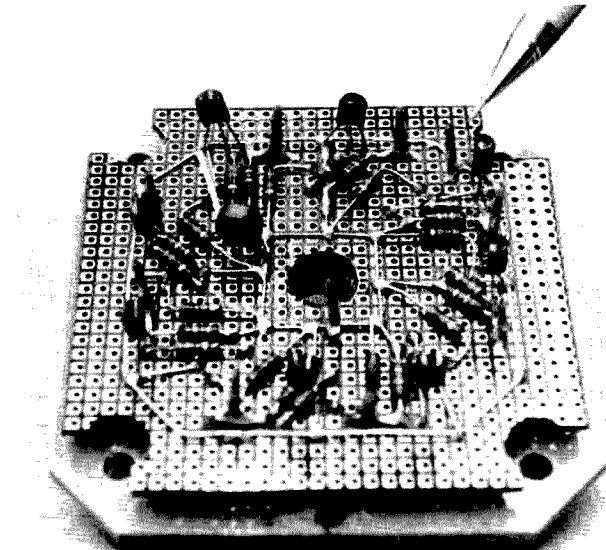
Photo E. The electronic components mounted on what we call a "do all" PC board. The pencil is pointed at one of the ten pins used to terminate the cable coming from the readout LEDs in the shack. The component at 10:00 o'clock near the shaft hole that looks like an overweight disc capacitor is the MOV.
